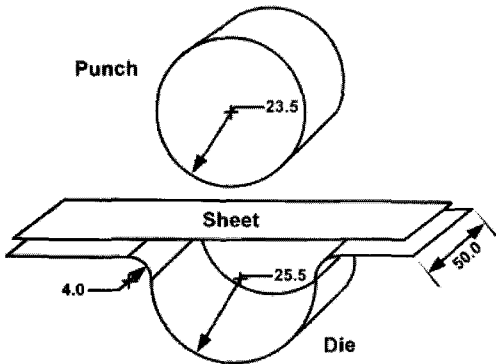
Schematic drawing of unconstrained cylindrical bending test
